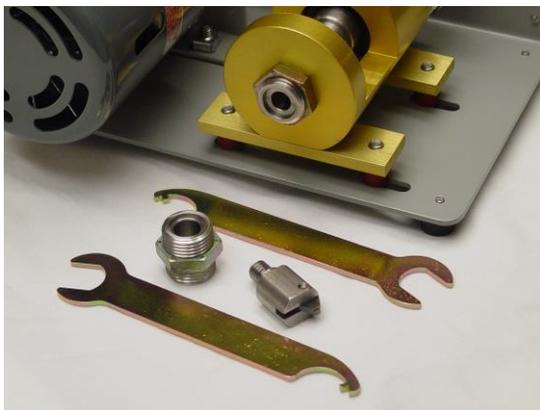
Case holder, interchangeable cutting head and spanner wrenches shown with trimmer.
